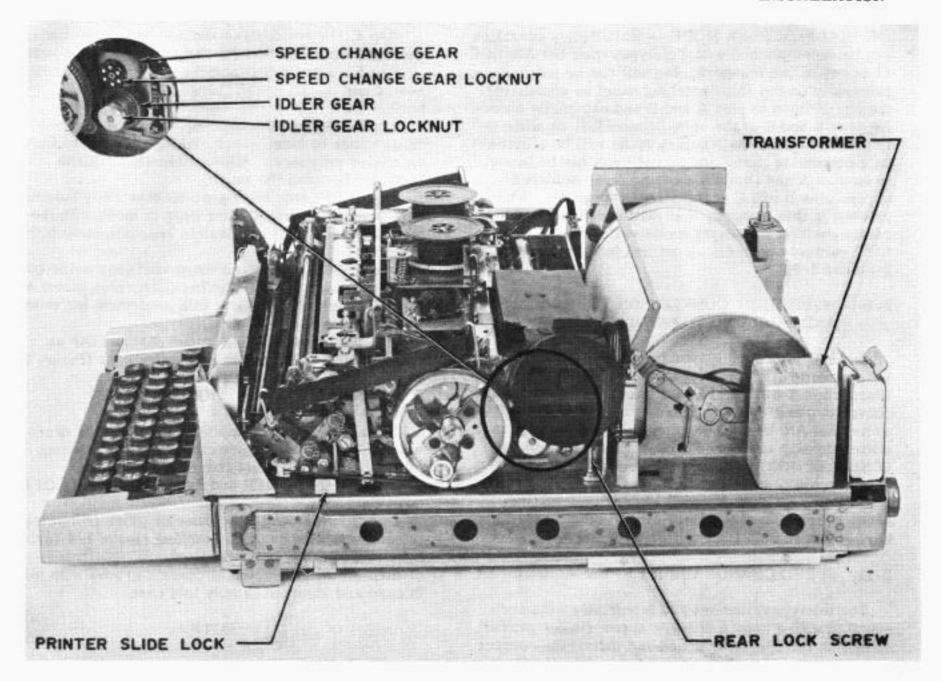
Right Side View of Teletypewriter Set AN/UGC-41, Case Removed
